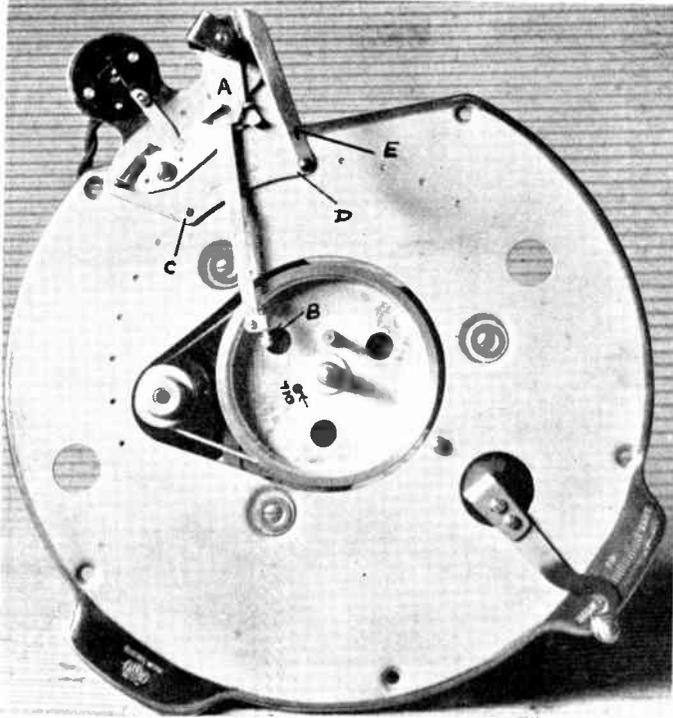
SETTING THE AUTO-STOP OF A GARRARD MOTOR TYPE E.D.
